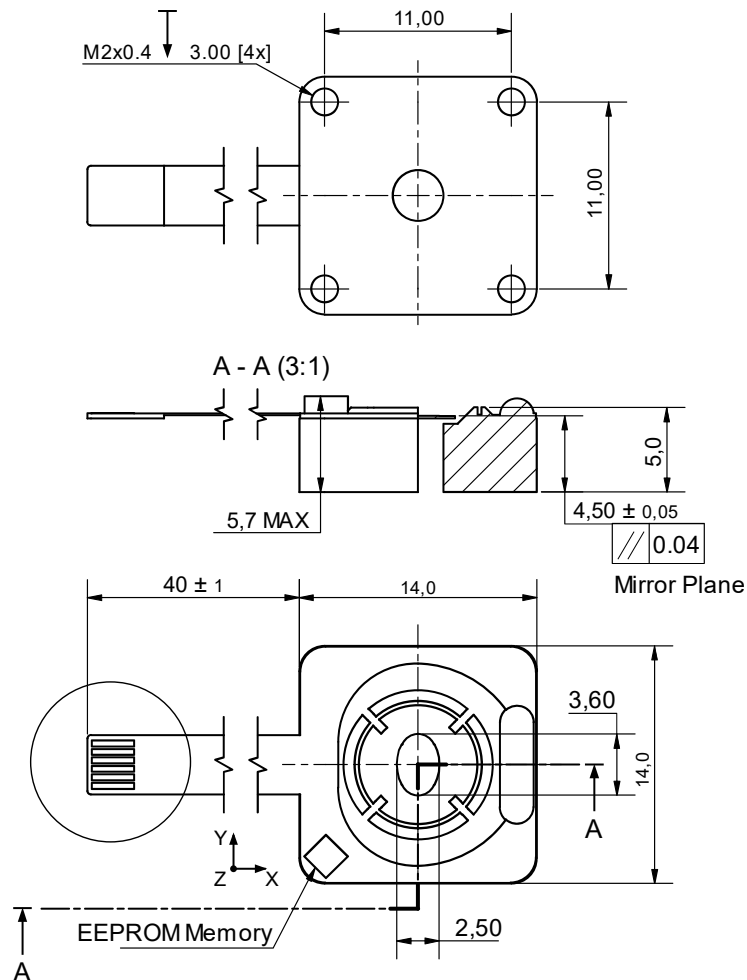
Mechanical layout for MM2536-2 Deflection Unit (units = mm)
